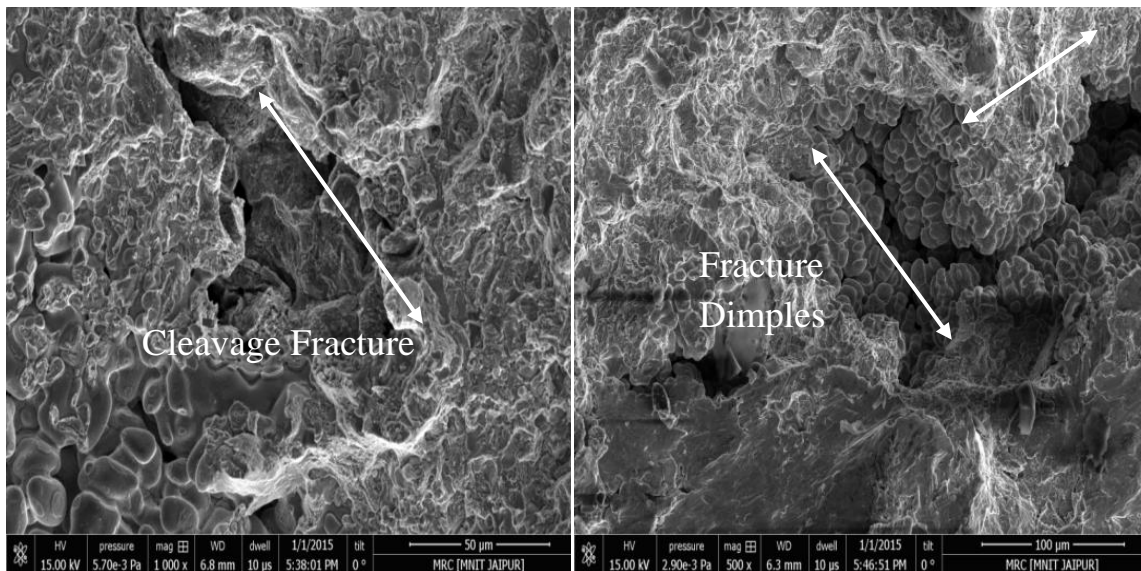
SEM fractographs for 0 wt.-% of MD particulate filled ZA-27 alloy composites after fracture test
